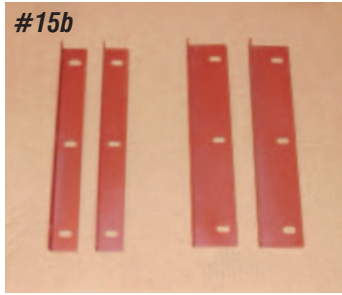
& 15b: The mounting brackets for the radiator bolt to nut inserts on backside of the tubular core support to give the front side of the core support a very clean look. The short brackets are used to mount the radiator in the V8 position while the long brackets are used to mount the radiator in the 6-cylinder position.
